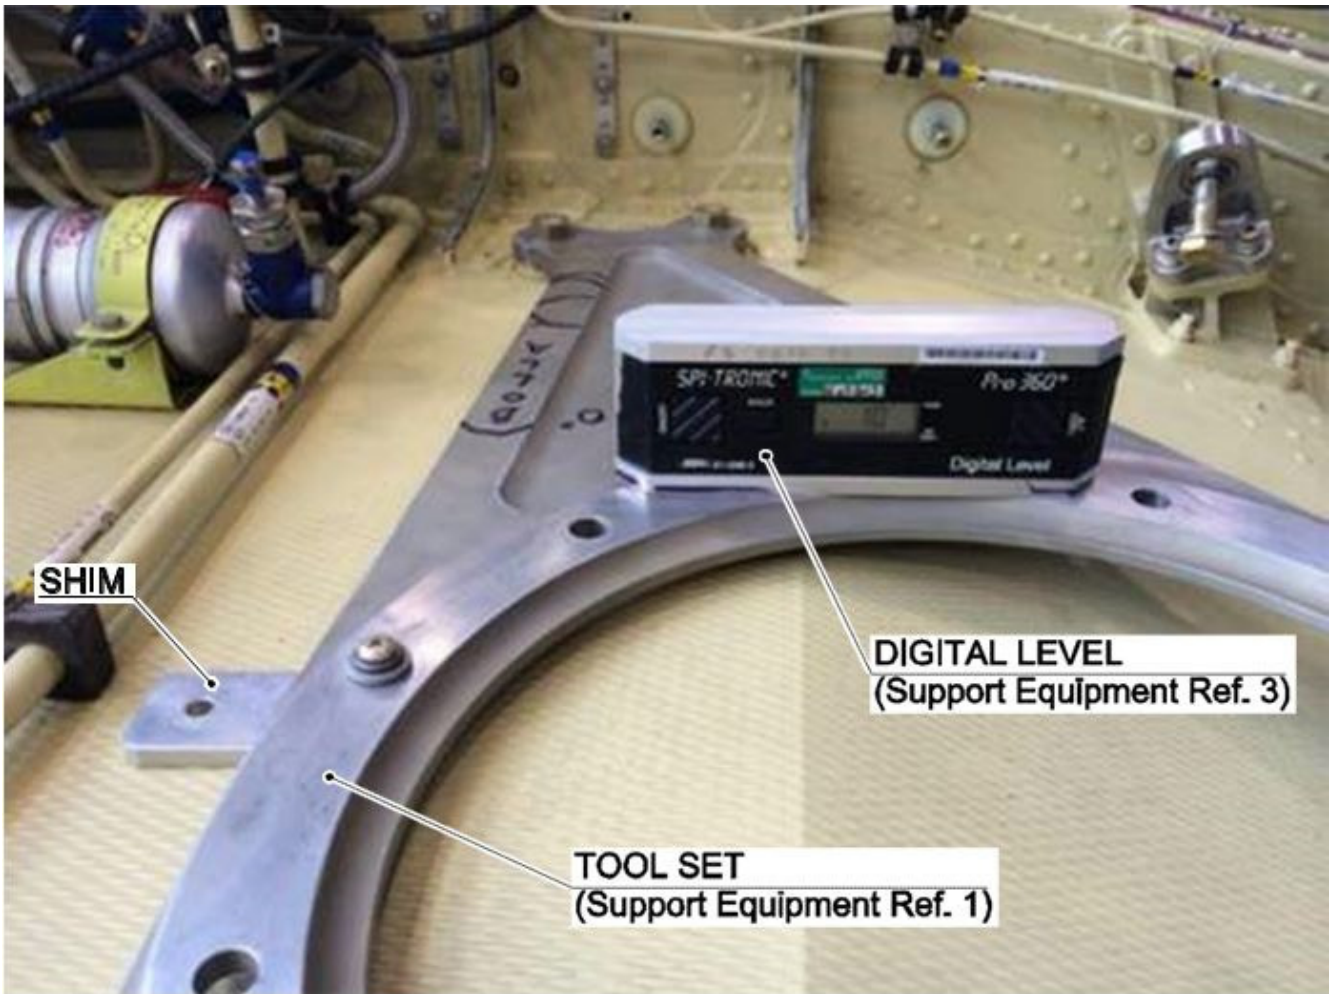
Tool set (Support equipment Ref. 1) – leveling
